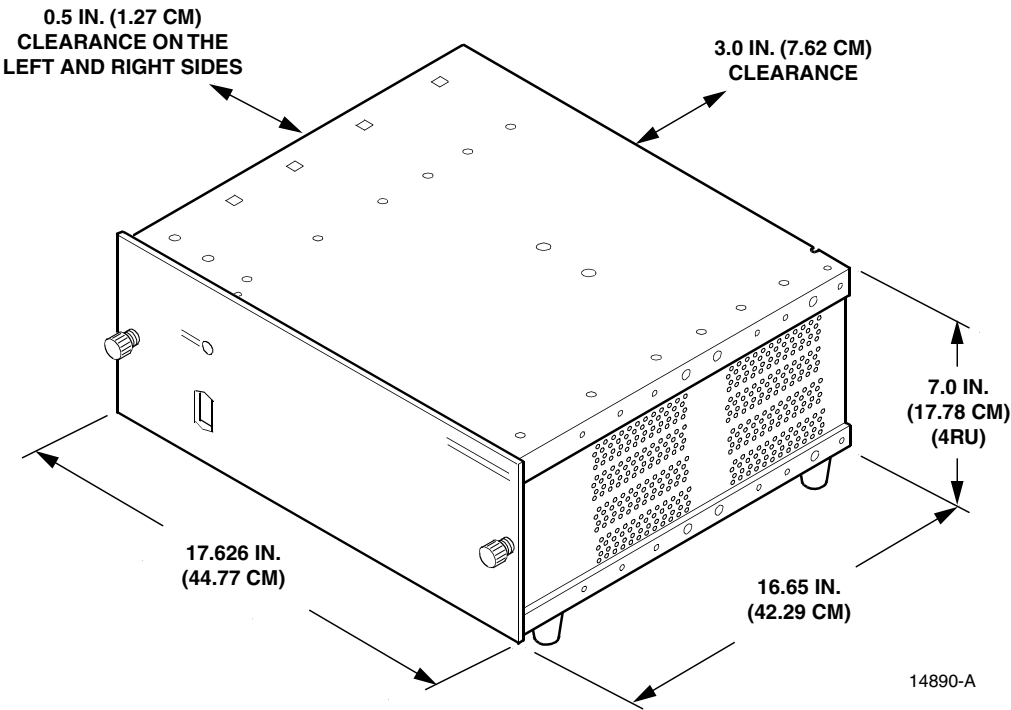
AAC-2 Chassis dimensions and ventilation clearance requirements
